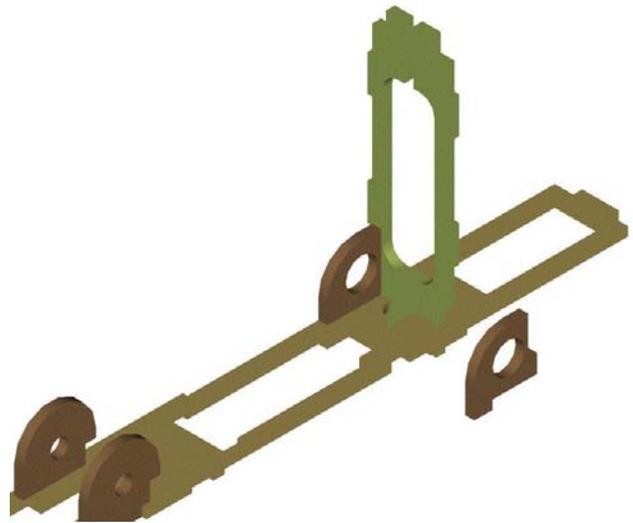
Install F2 and two F12 formers. Square them with the main fuselage former and glue in place.
